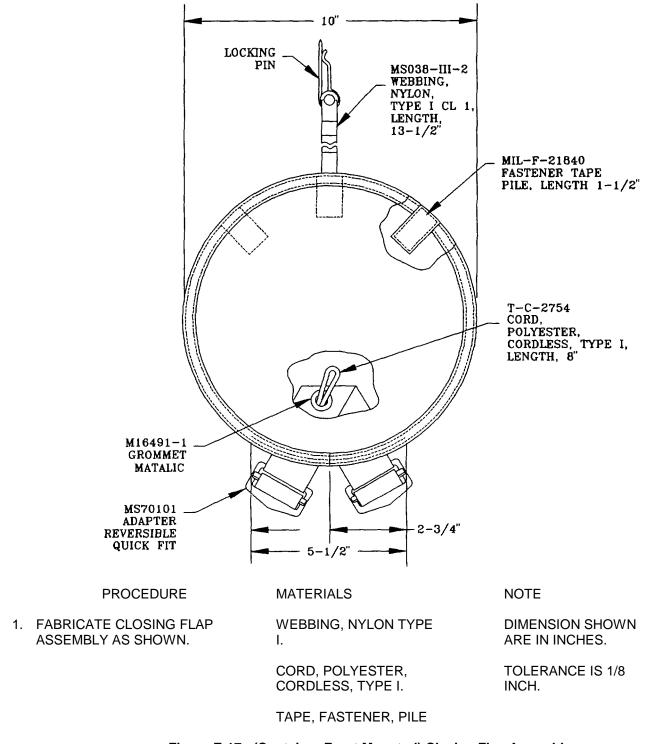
(Container Front Mounted) Closing Flap Assembly
